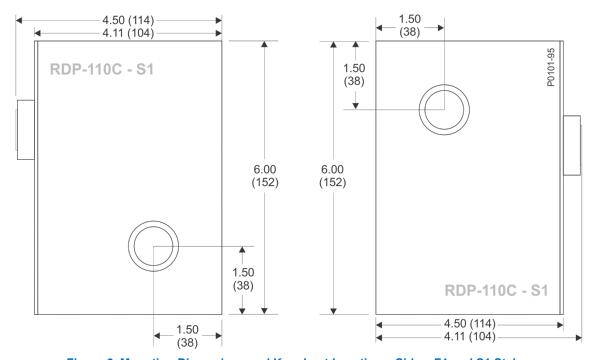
Mounting Dimensions and Knockout Locations, Sides, F1 and S1 Styles
